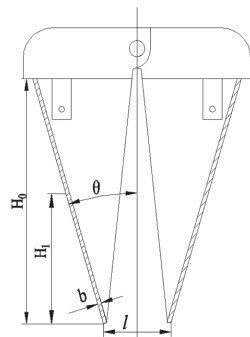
Schematic diagram of soil opener. Note: b is cutting edge section thickness (mm); l is bottom size of soil opener (mm); H_0 is height of conical-table-shaped soil opener (mm); H_1 is soil-opening depth (mm); θ is penetration angle ($^\circ$).
